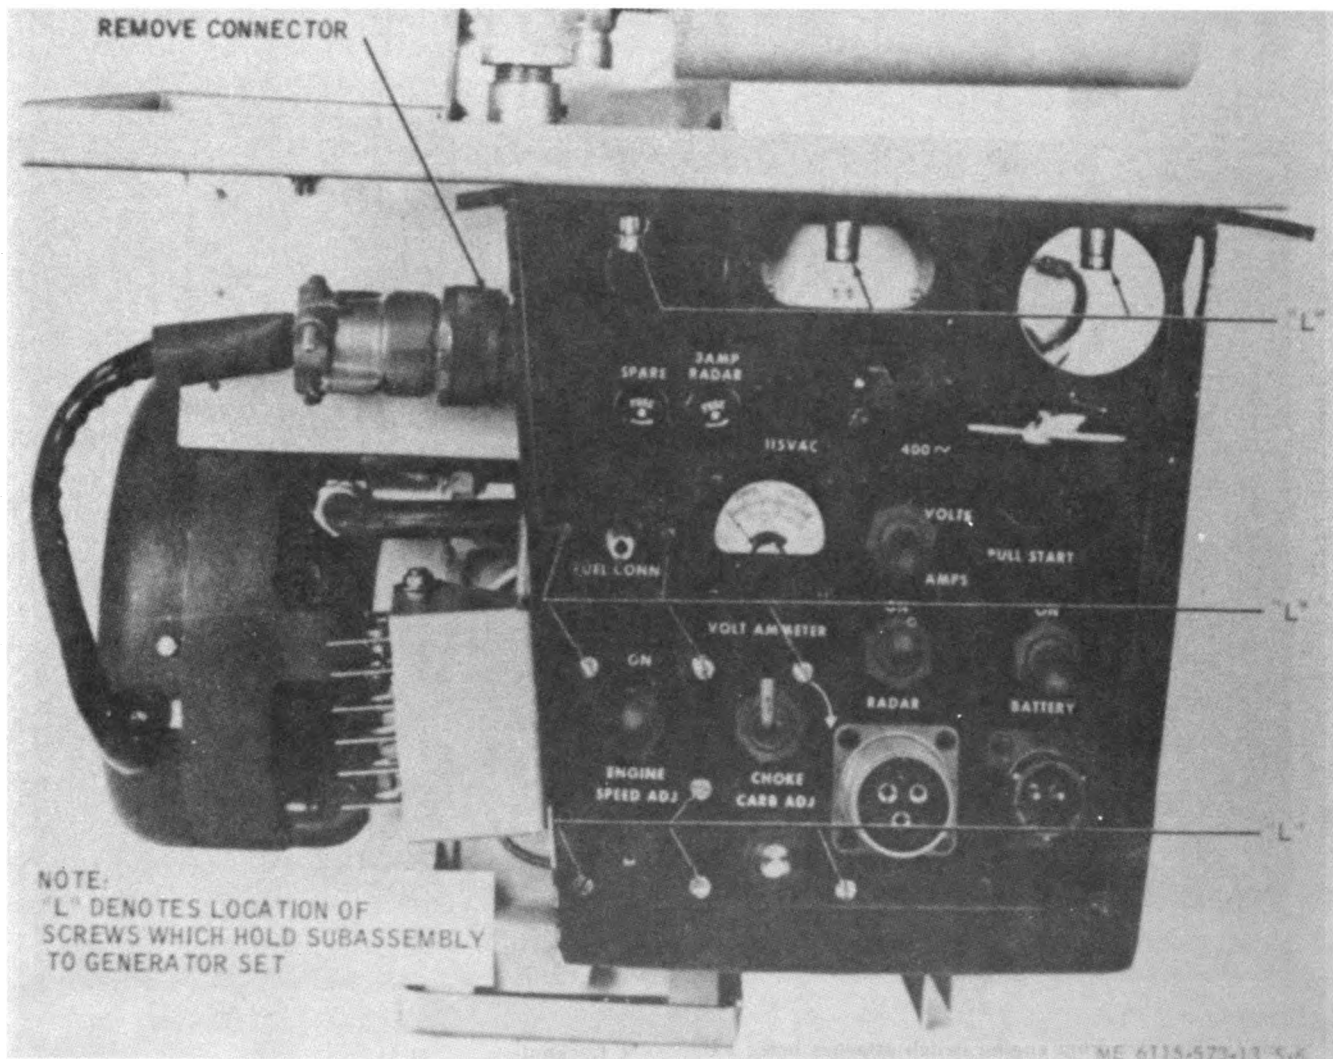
Electrical subassembly, removal and installation (PU-532 / PPS-4).
